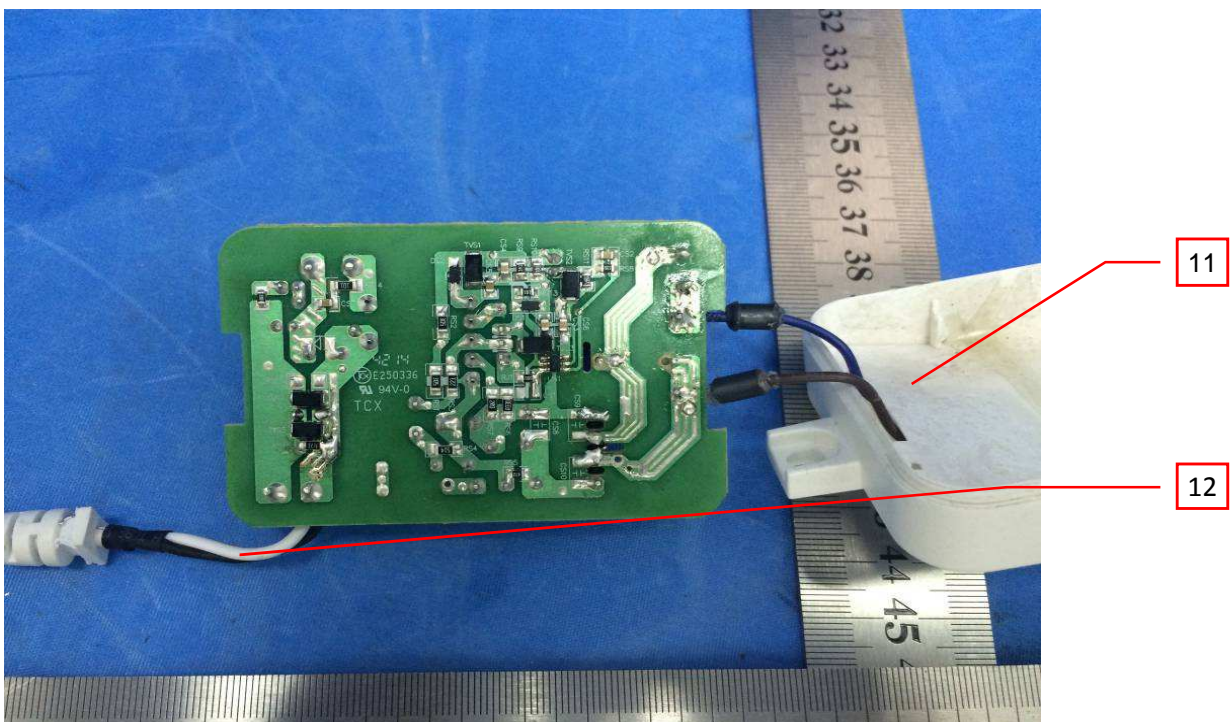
Soldering side view of PCB of model GT-41134-0606-W2-TAB
